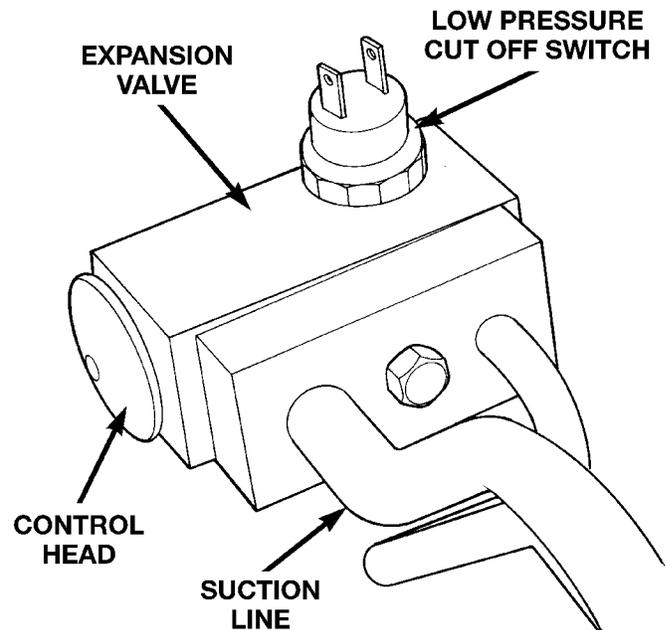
Low Pressure Cut-Off Switch and Expansion Valve - Typical
